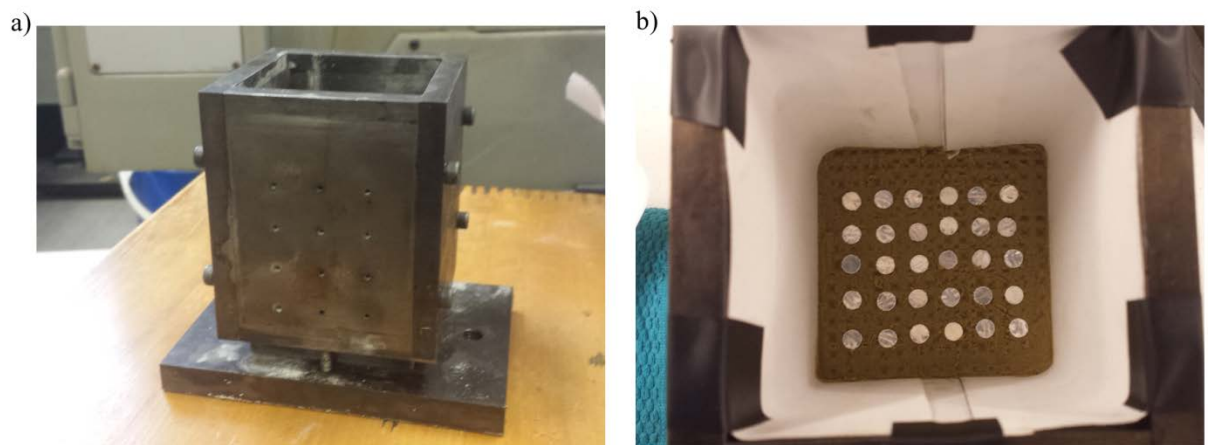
a) Rectangular mould designed to hold samples under pressure and high temperatures. b) Aluminium discs on sand layer inside rectangular metal mould. The paper lining prevents the sample sticking to the mould.
